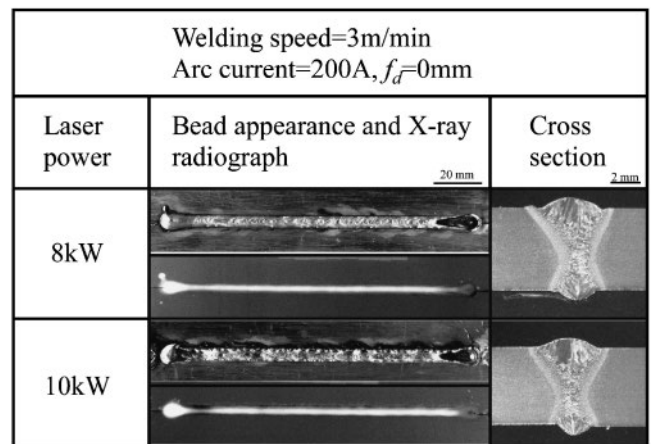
Bead appearances, X-ray radiographs and cross sections of fully-penetrated welded joints of 5 mm thick Ti-6Al-4V titanium alloy by single-pass hybrid welding with different laser power.
